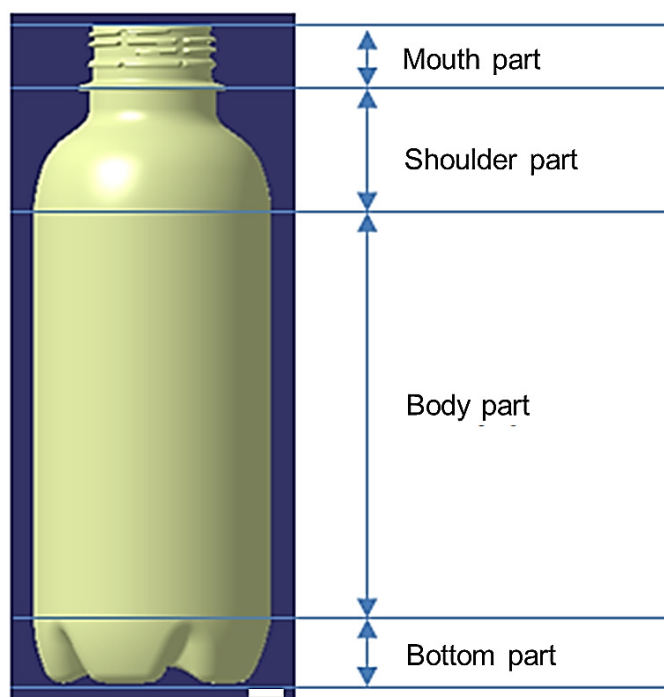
Appearance and parts of PET bottles. The bar represents 10 mm.
